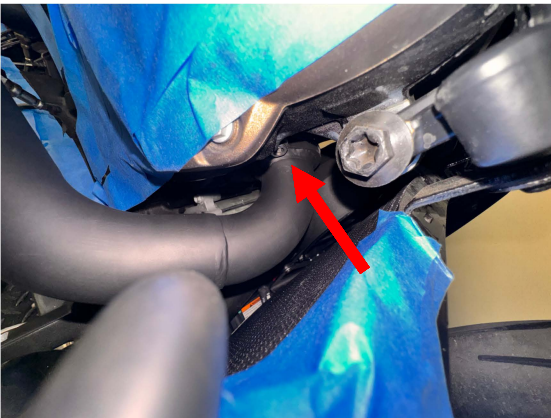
Insert the two screws to install the front header pipe as shown.
